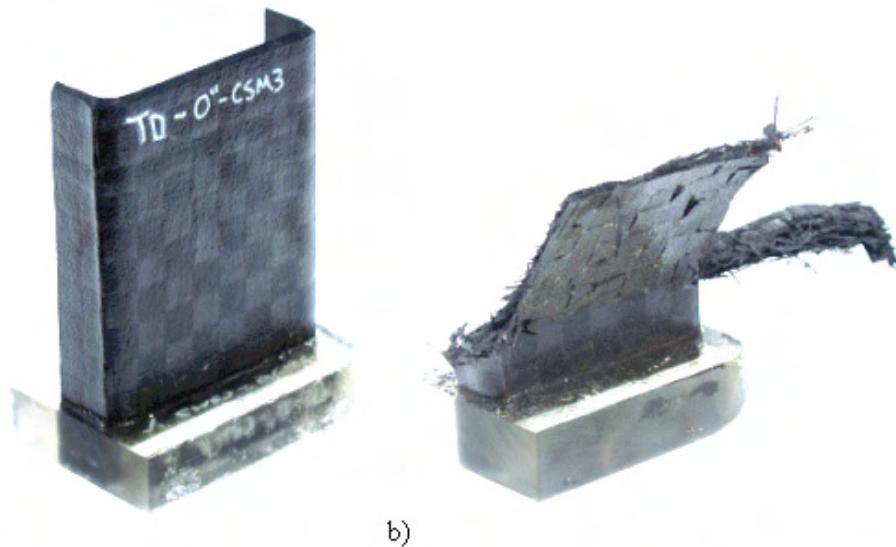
a, b. Small C-channel, specimen III, before and after crush testing.
